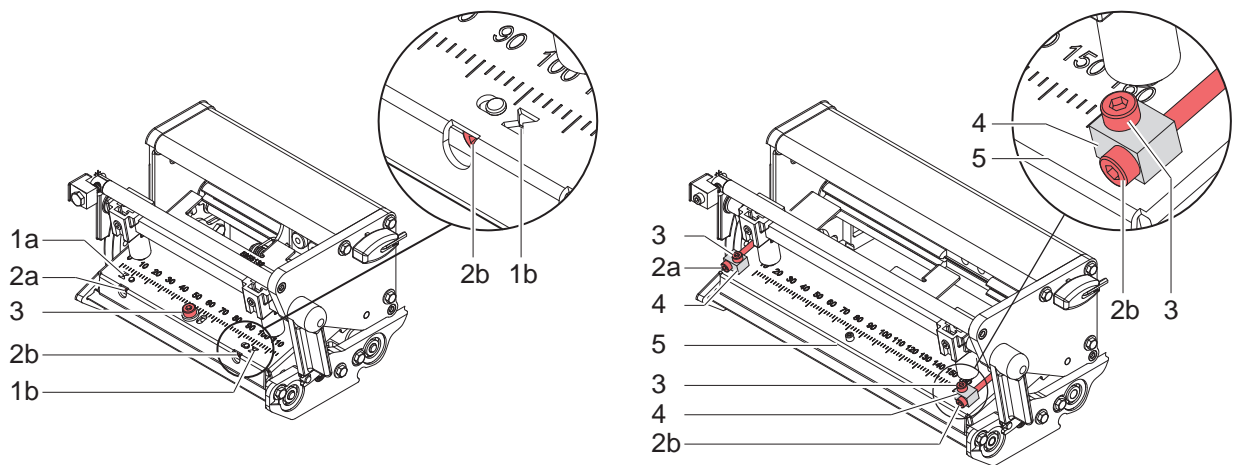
Adjusting the printhead position (left PX4 / right PX6)
